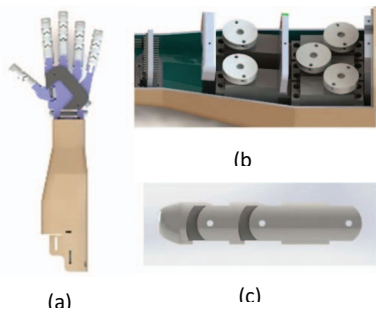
Computer aided design of (a) Prosthetic hand assembly (b) servo motor assembly inside the arm (c) Finger assembly
